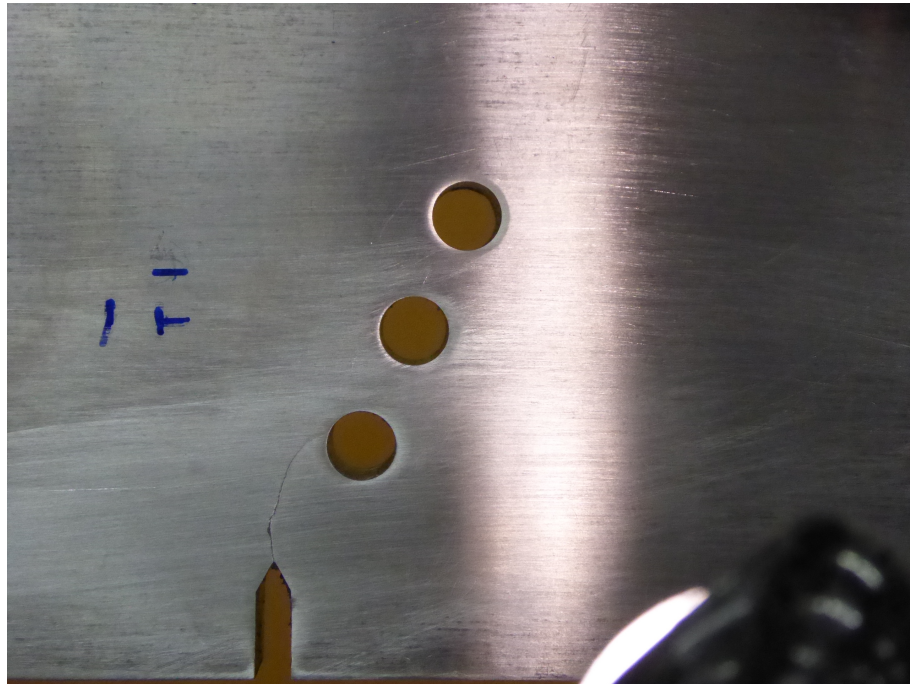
Three point bend specimen with 60 mm width and 3 additional holes crack path.
